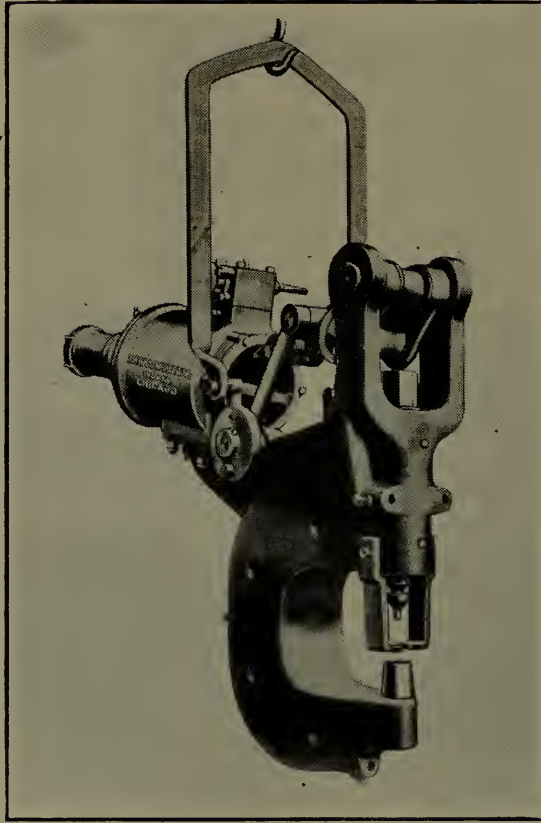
A combination pneumatic yoke riveter and punch specially adapted for channel and angle work.
